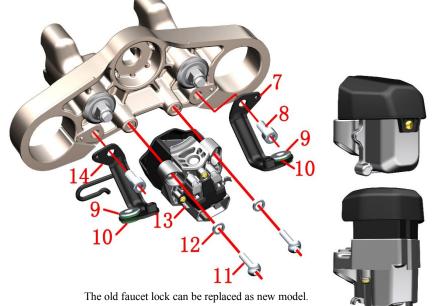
FRONT FORK		Front shock absorber, upper plate component	CHK
